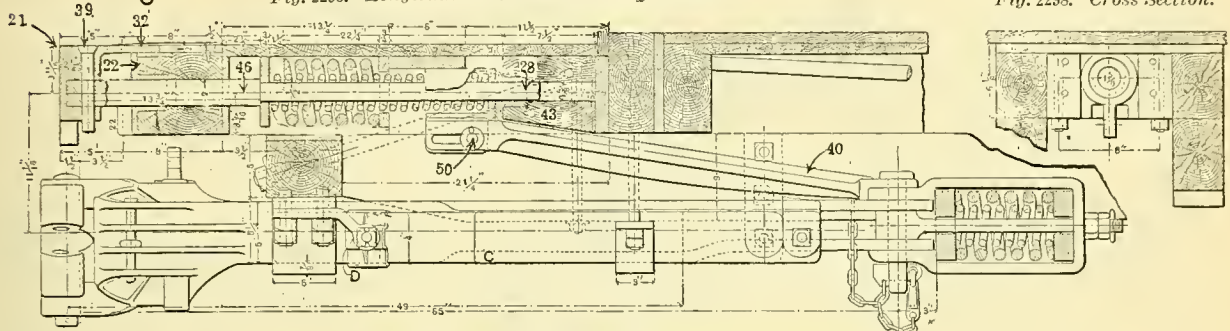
Longitudinal Section through Side Buffer-stem.
